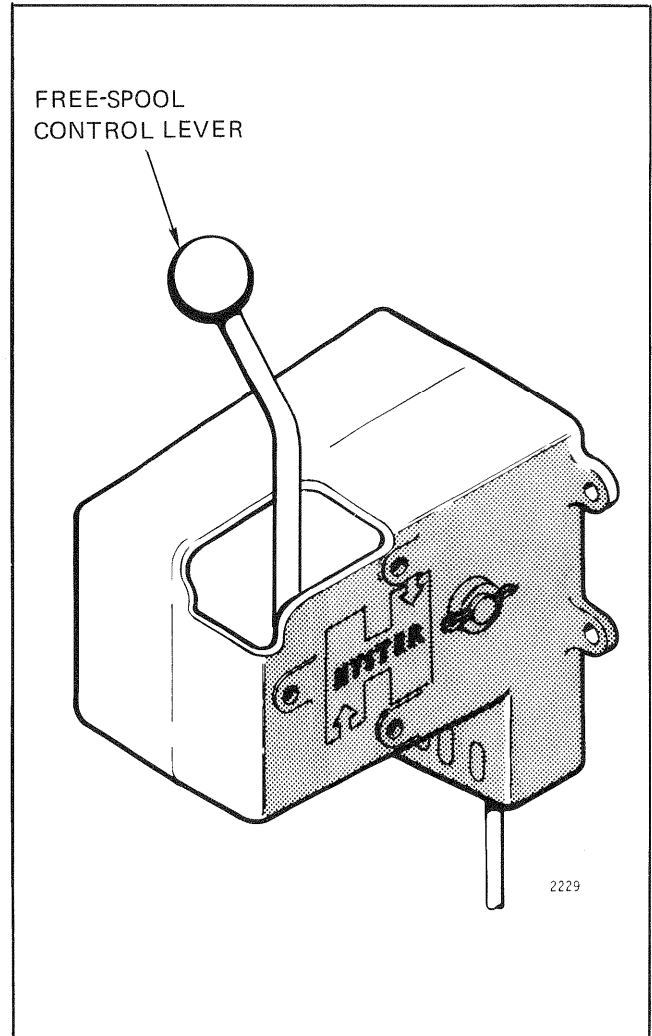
OPTIONAL FREE-SPOOL CONTROL ASSEMBLY, DIRECT DRIVE WINCH
